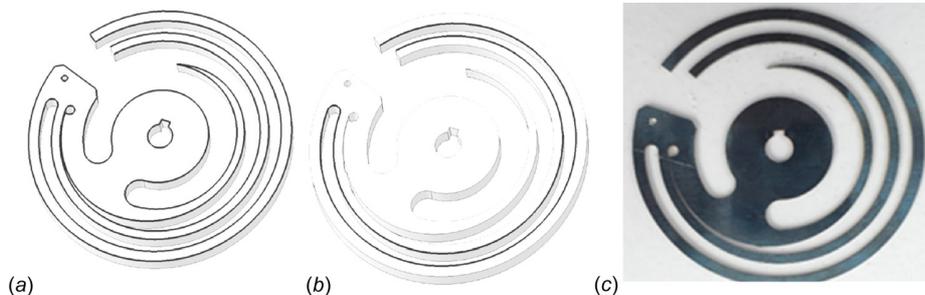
Toolpaths: (a) rough trimming by μ -AWJ, (b) finishing by μ -WEDM, and (c) μ -AWJ machined sample
